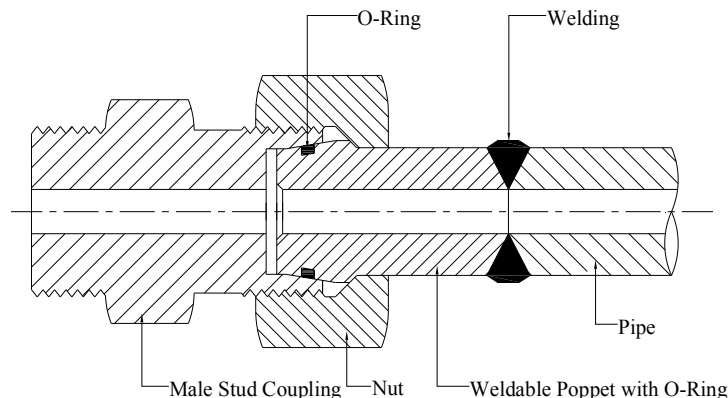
Threaded Type Welded End Fittings
